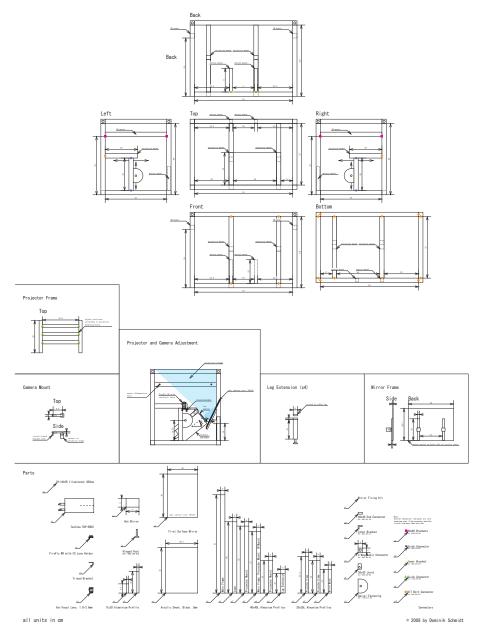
Drawing of frame with camera, projector, and IR mounts
